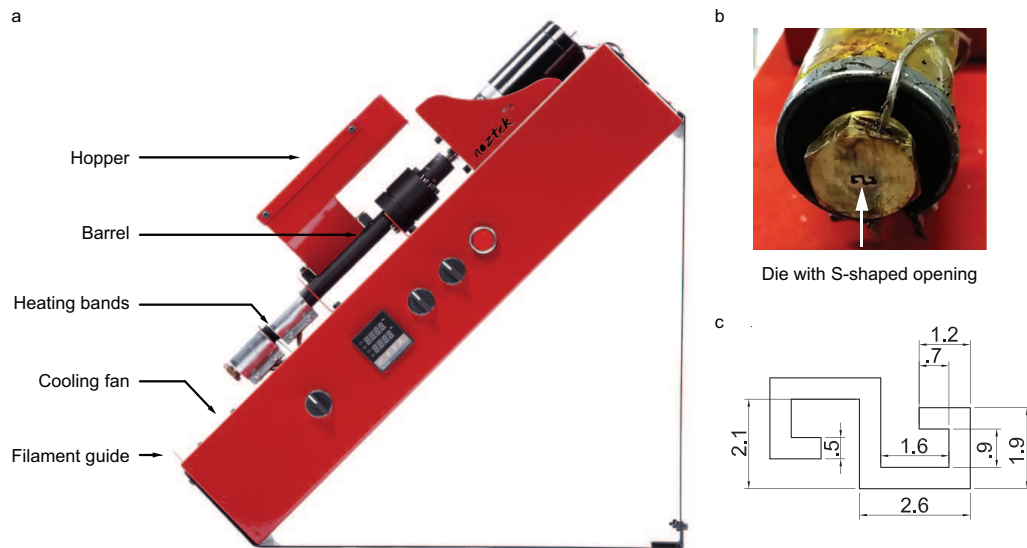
(a) The Noztek Pro filament extruder used to manufacture the bio-inspired strips. Relevant parts have been labelled. Image has been adapted from [www.noztek.com](http://www.noztek.com). (b) The custom die with S-shaped cross section. (c) Dimensions in mm of the cross-section of the bio-inspired strips.
